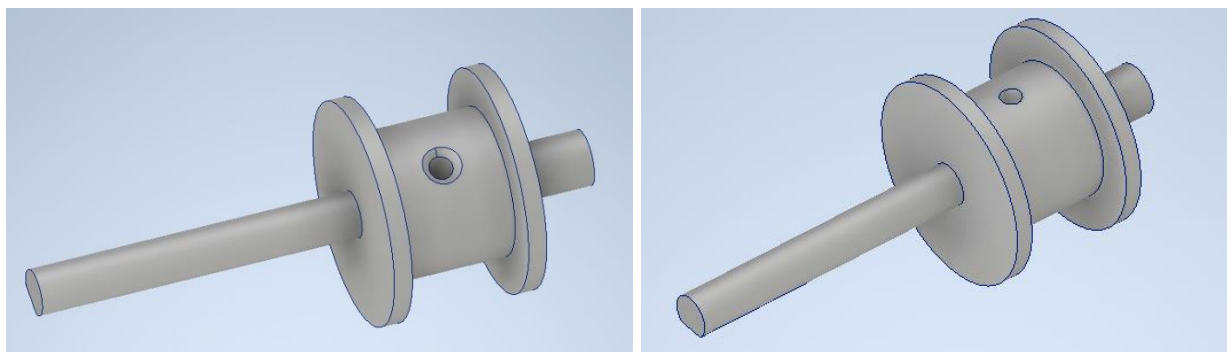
Spool modification. Left: New spool. Right: Old spool.
